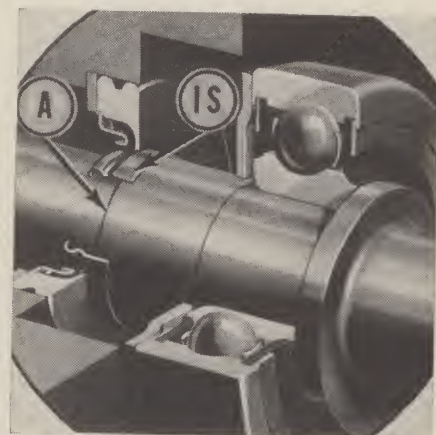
Details of shaft seal used on Vickers hydraulic pump. Seal installing sleeve (15) is furnished with each new seal and must be removed after seal is installed.
